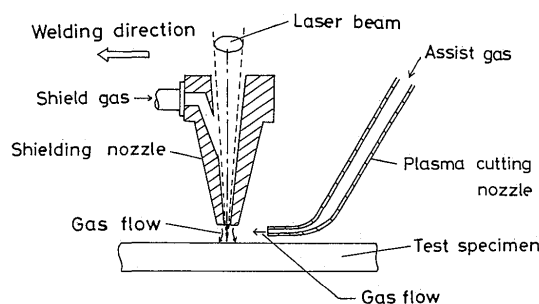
Schematic diagram of plasma cutting nozzle for welding.
